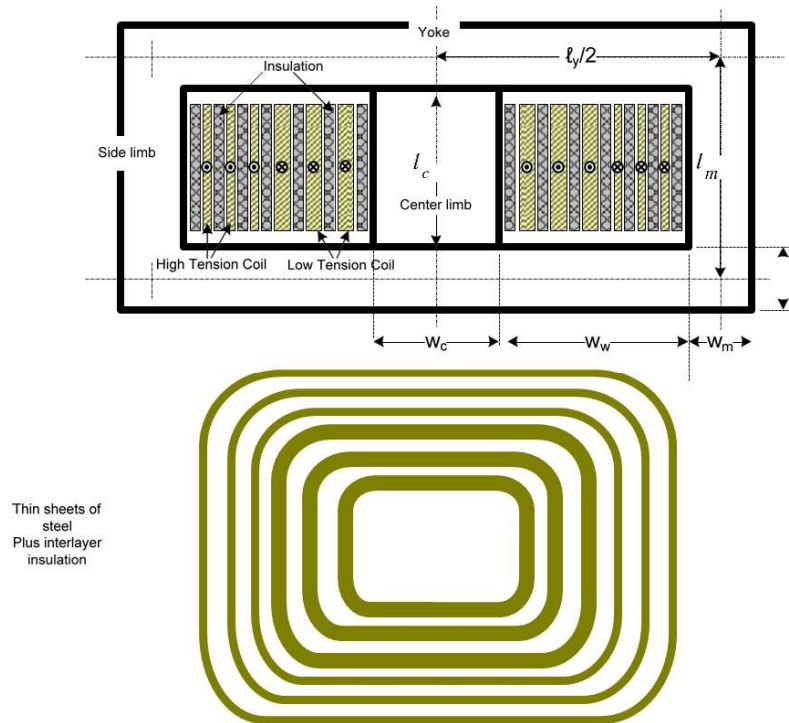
The winding and core configuration of a single-phase two-winding transformer: face and top views.
